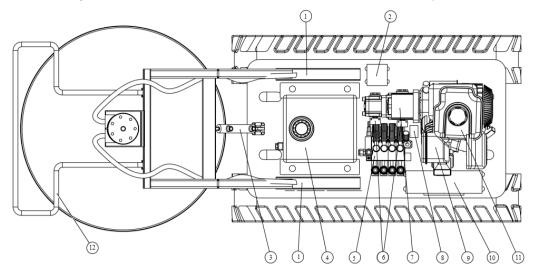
3D CAD model of the new mower design - top view: 1- mounting bracket; 2 - remote controller; 3 - hydraulic cylinder; 4 - oil tank; 5 - hydraulic distributor; 6 - flow regulator; 7 - two-section pump; 8 - overflow valve; 9 - combustion engine; 10 - radiator; 11 - fuel tank; 12 - protective barrier
